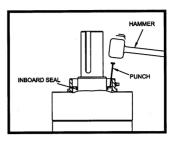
Piercing of Inboard Seal with Punch
